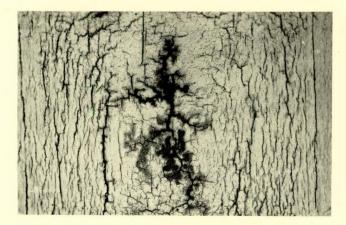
Bore of steam pipe branch showing corrosion fatigue cracks (surface cleaned prior to photographing)
